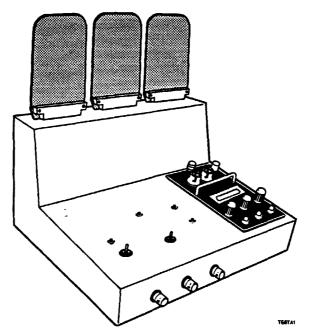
A1, A2, A3 Boards Test Fixture
